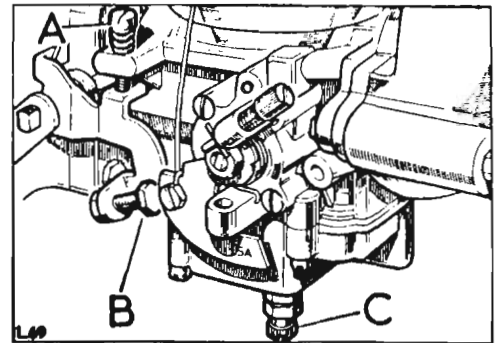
Carburettor slow-running adjustment, 6-cylinder Petrol models
